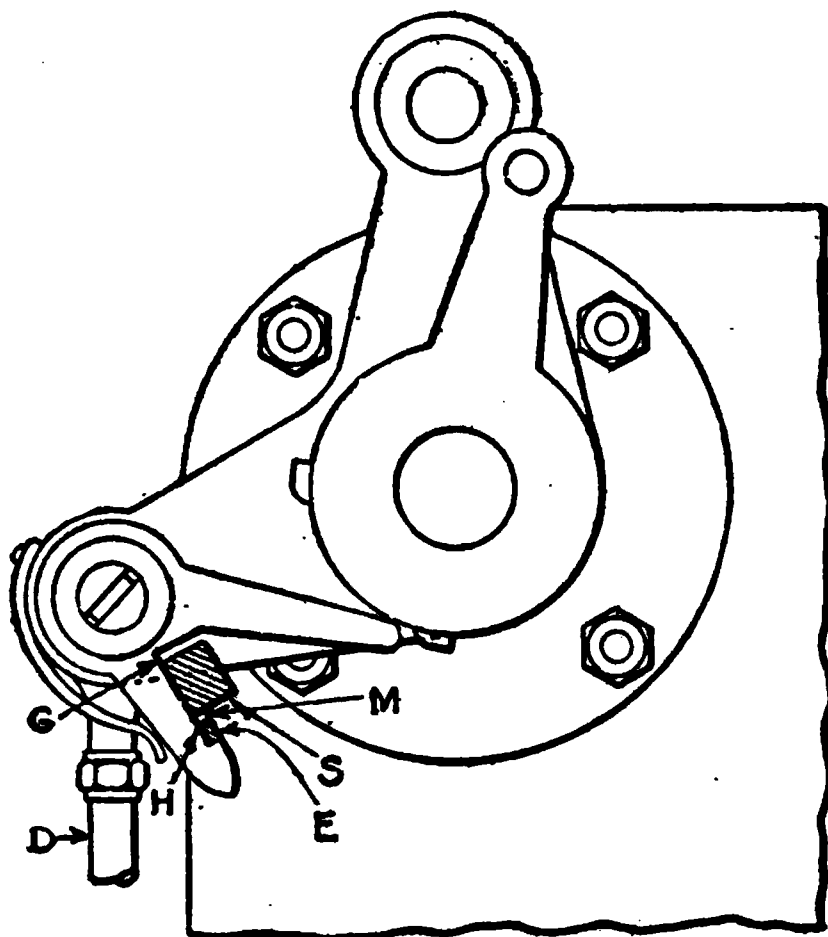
Detail of valve gear illustrating adjustment of dash pot rod.
